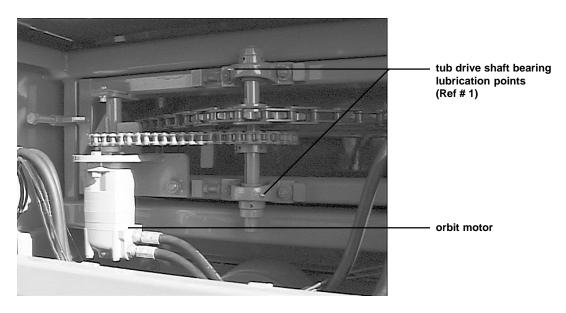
both tub drive shaft bearing lubrication points
